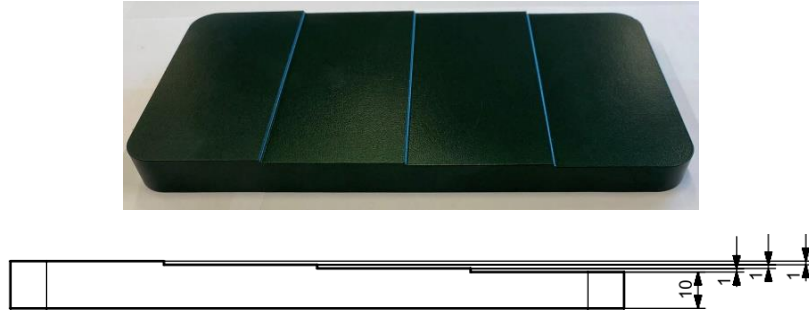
Insert used for compression moulding (above) Drawing of the insert with dimensions in millimetres (below).
